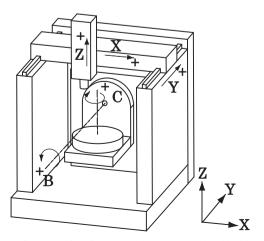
The configuration of the five-axis machine tool considered in this paper [33].
